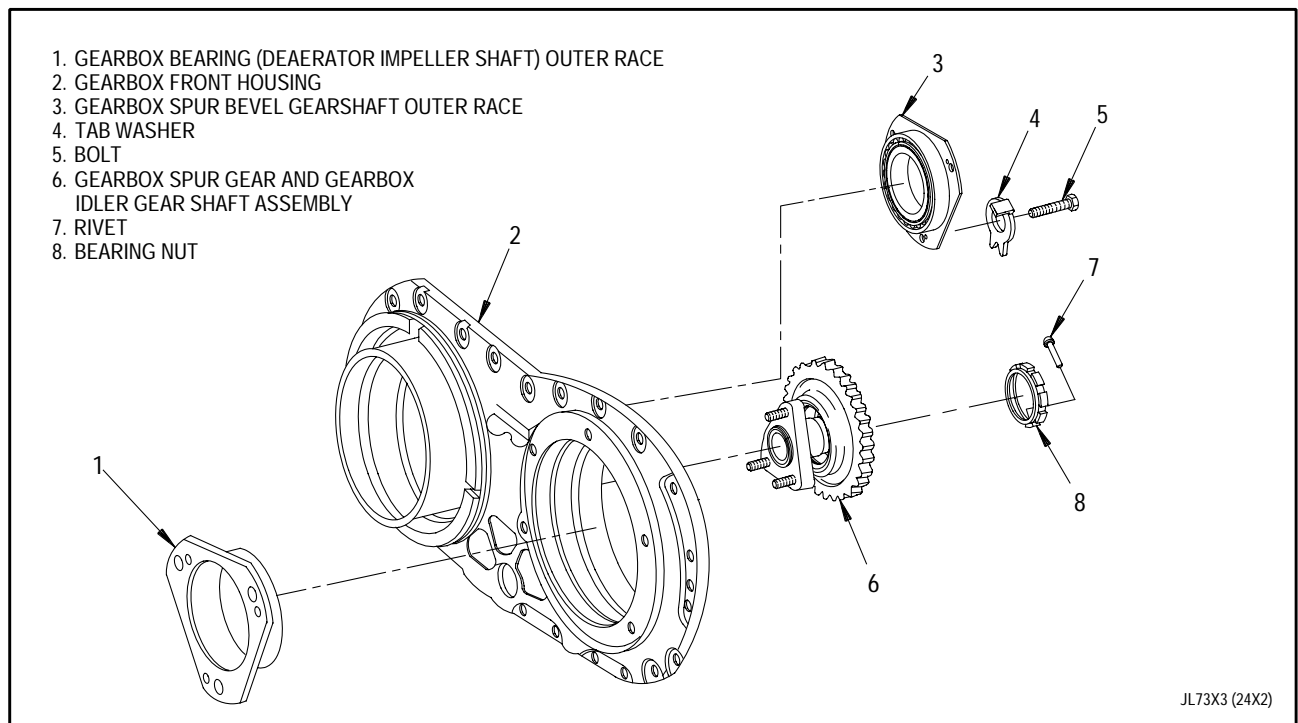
Gearbox Spur Gear and Gearbox Idler Gear Shaft Assembly - Removal
